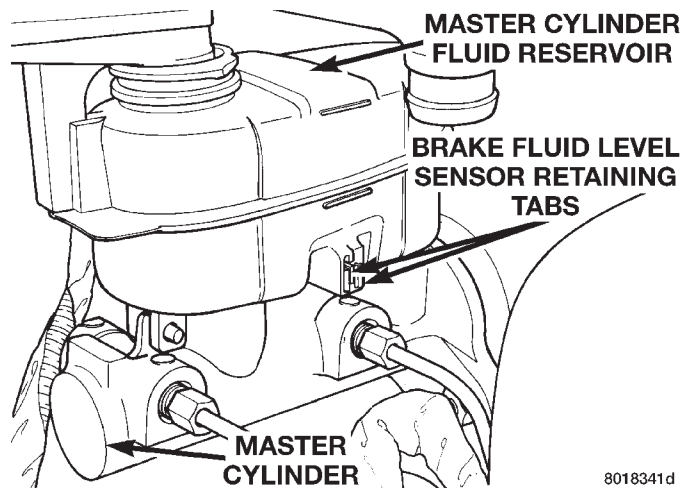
Master Cylinder Brake Fluid Level Sensor
